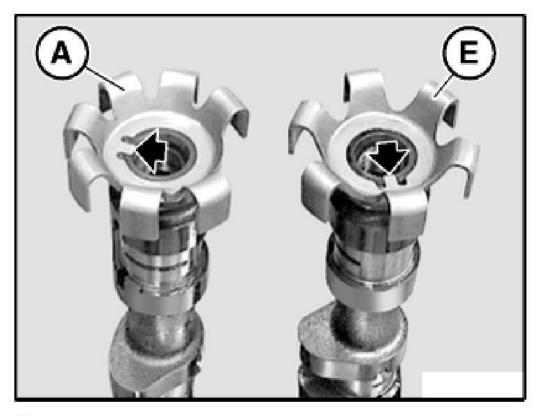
Identifying Exhaust Camshaft And Inlet Camshaft Courtesy of BMW OF NORTH AMERICA, INC.
